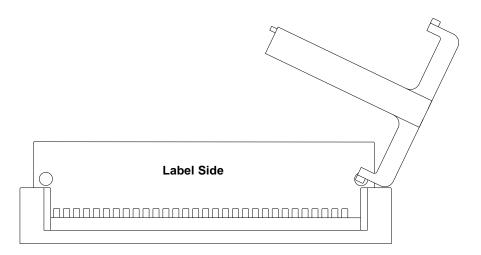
Inserting the SIMM Extraction Tool on the right side
